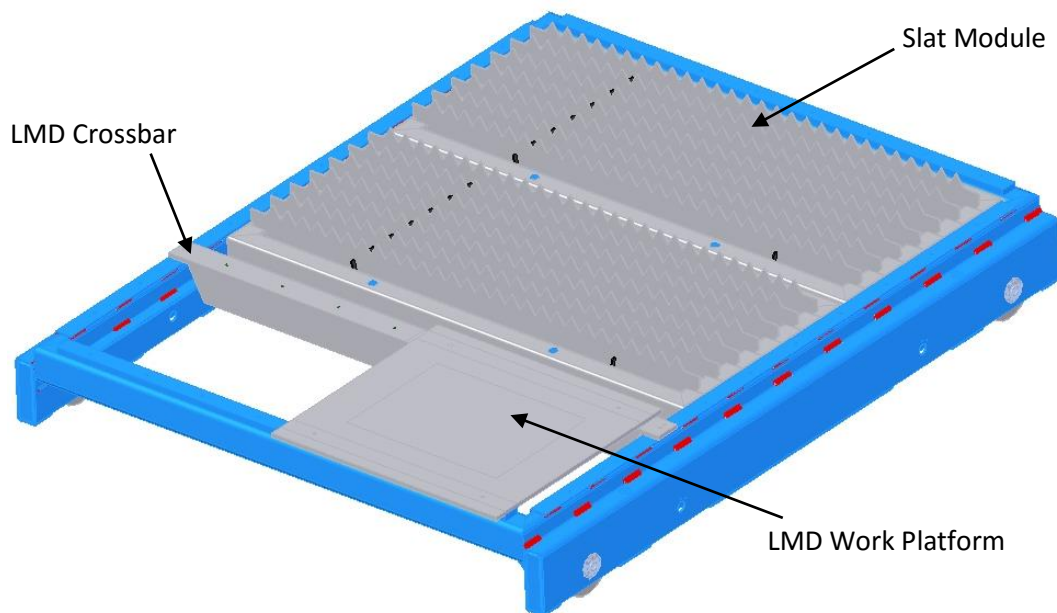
Final assembly of the LMD hybrid table. Weld beads are coloured in red.
